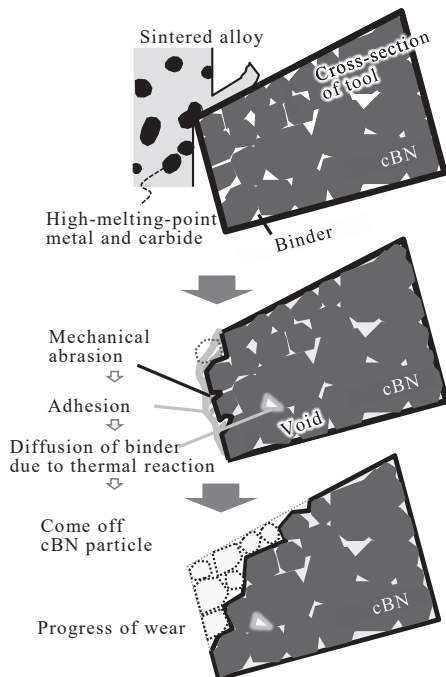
Schematic illustration of the mechanism of tool wear in the machining of a sintered alloy
